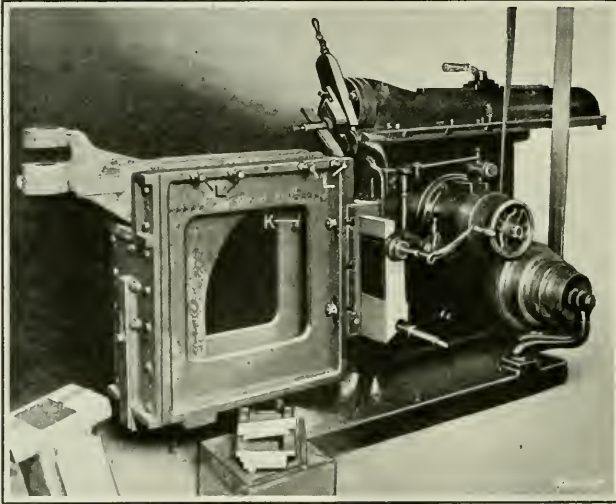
Twenty-four-inch Shaper equipped for planing Bearing for Top Carriage on Drilling Machine Columns
